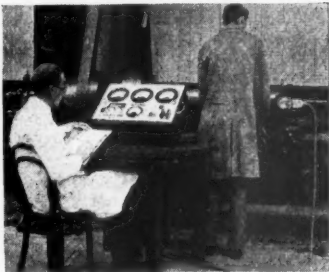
Large tool dynamometer from 100 lb. to 3 tons pressure.
